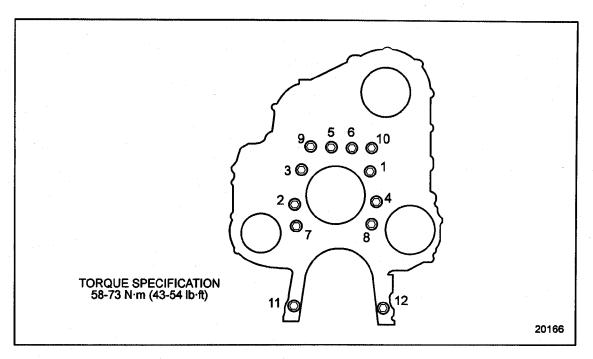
Gear Case Housing Bolt Torque Sequence
